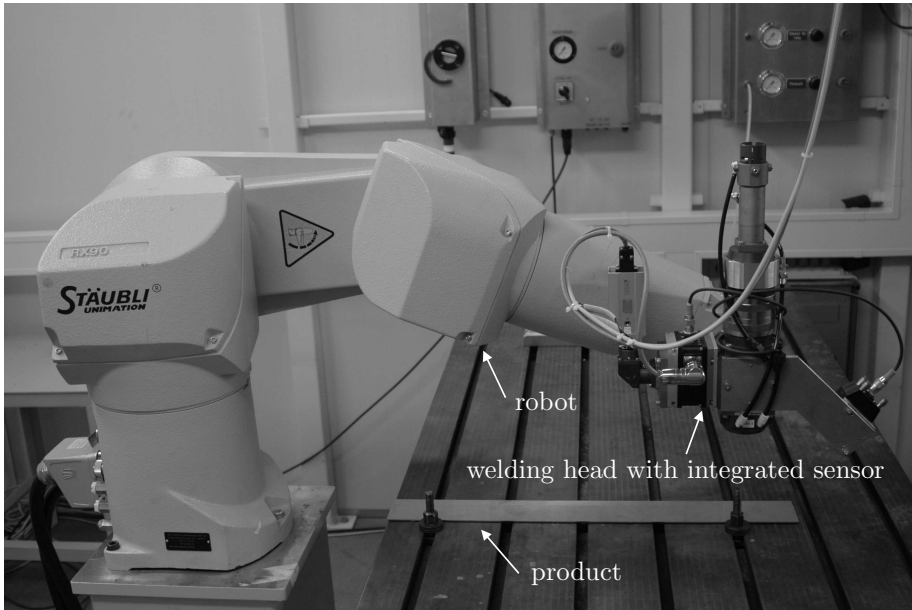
The Stäubli RX90 robot carrying a welding head with integrated seam-tracking sensor
